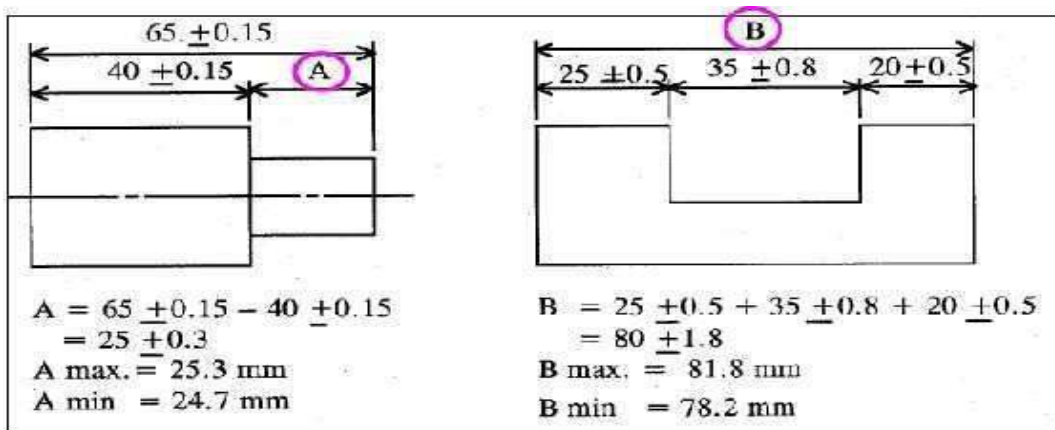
TOLERANCE BUILD UP
